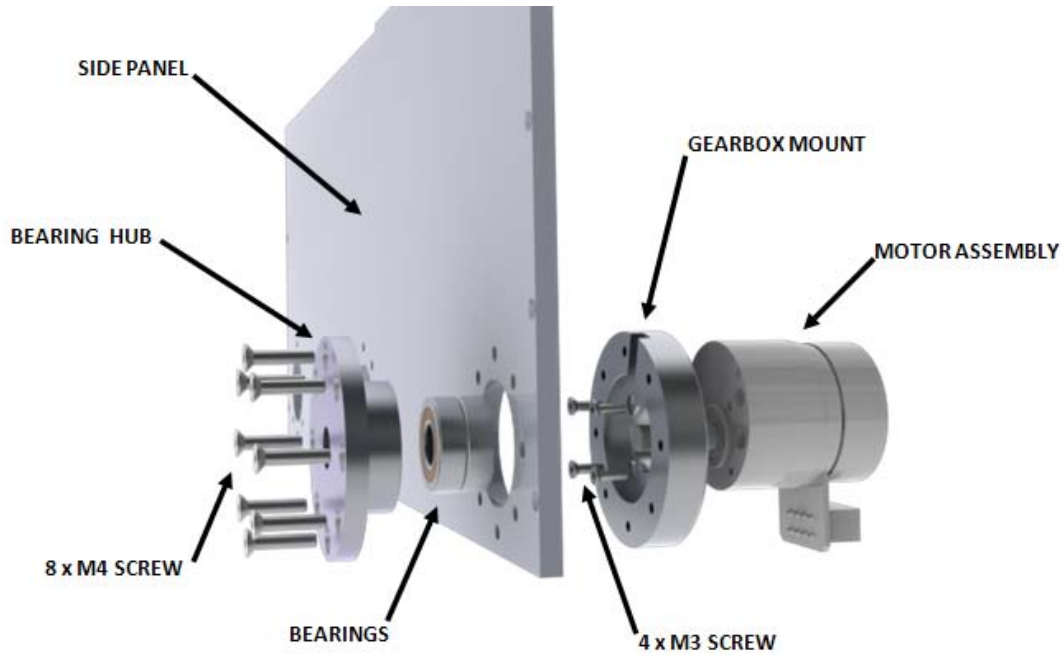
Rendered image of an exploded view of the wheel coupling assembly
